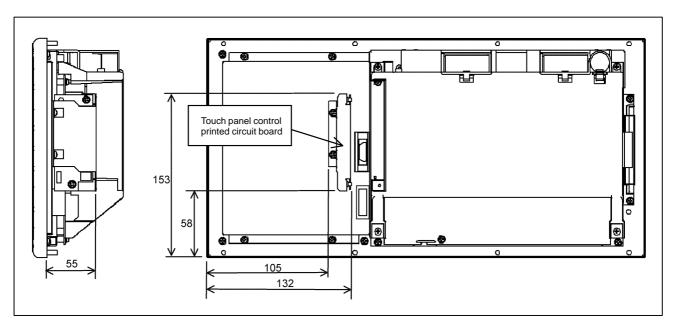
(a) Installation position of the touch panel control printed circuit panel (LCD, MDI horizontal type)
